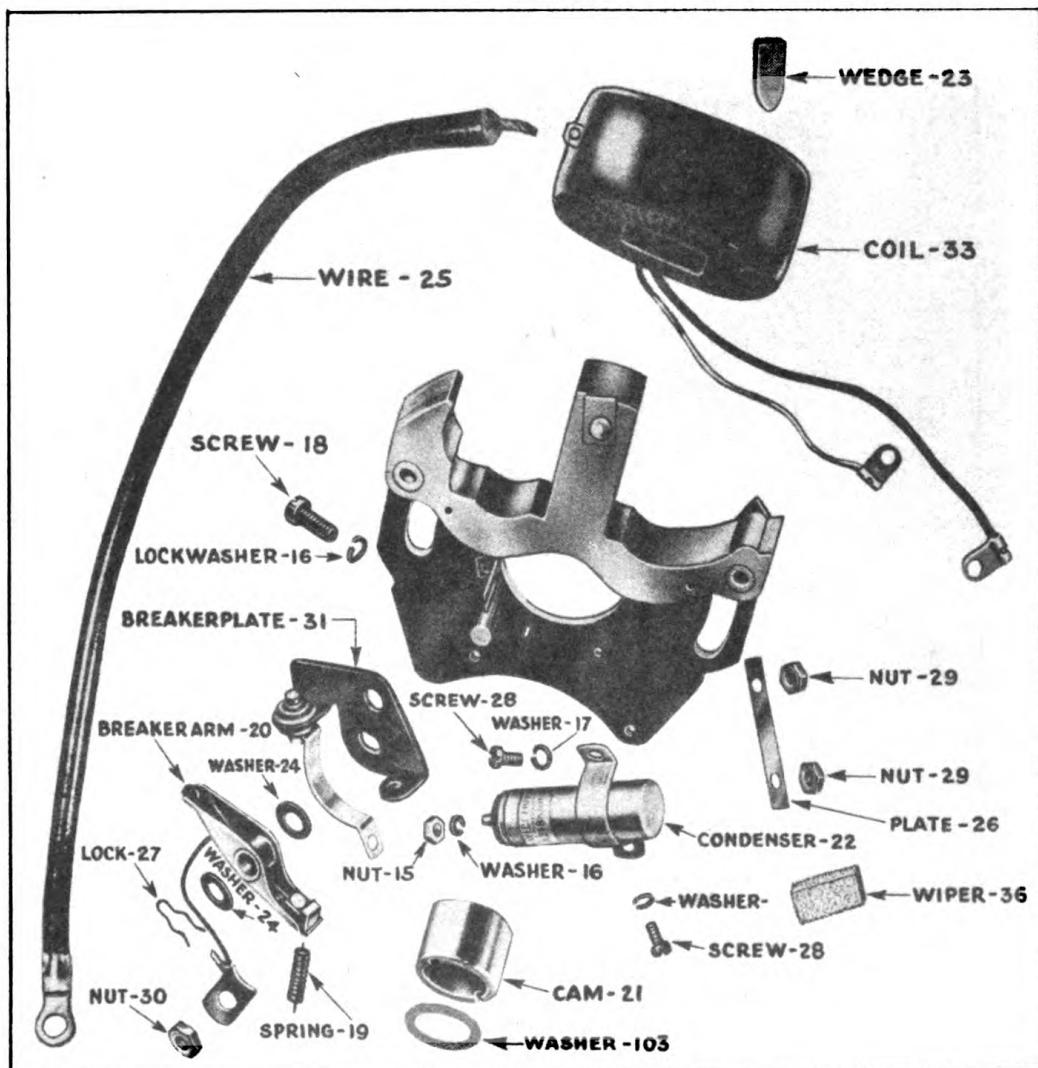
MAGNETO STATOR PLATE ASSEMBLY
